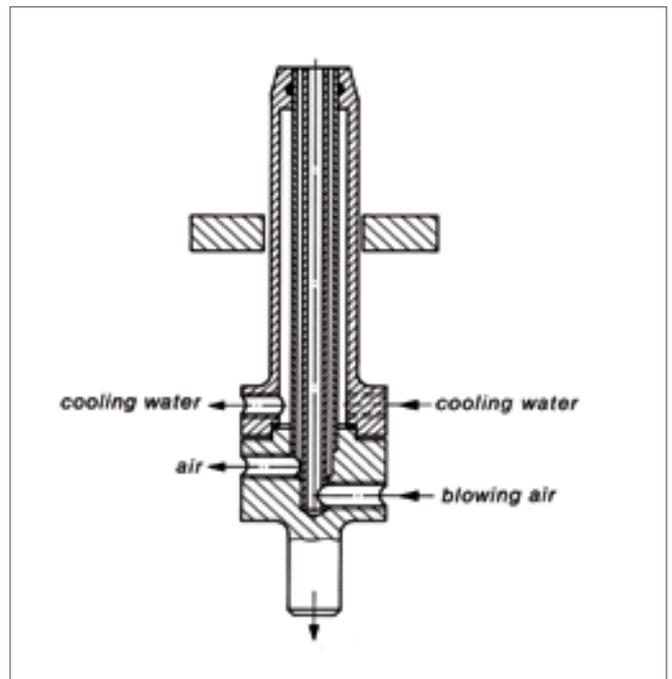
Section Through a Blowing Mandrel for Compressed Air Cooling
